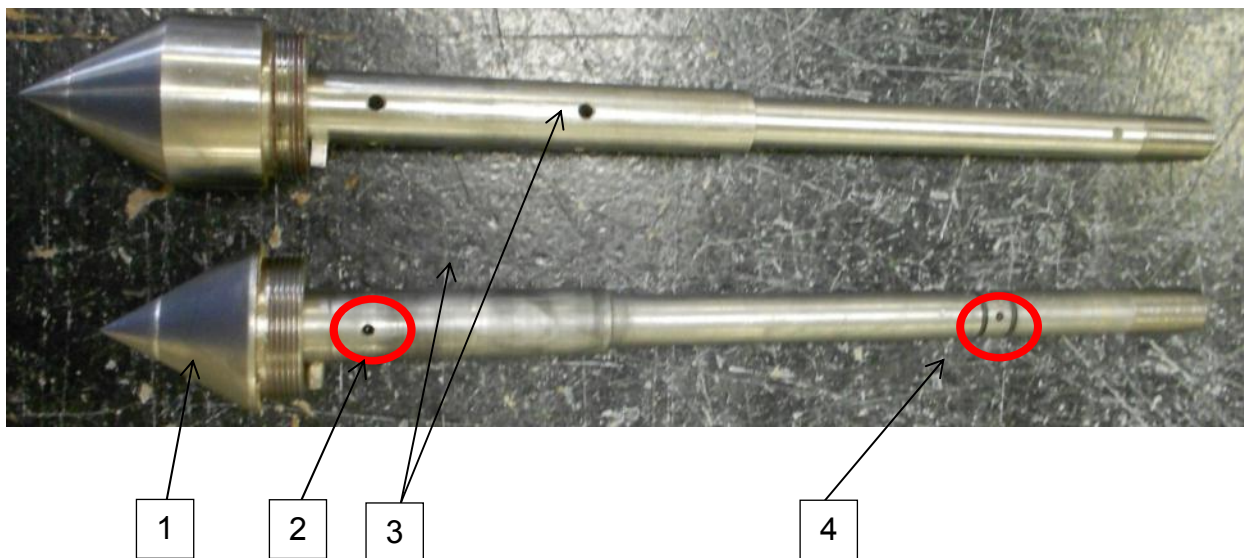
Second probe modification: (1) the shorter cone tip; (2) new inner rod vertical flow port; (3) reduced length of the thicker inner rod section; (4) new inner rod horizontal flow port with O-rings
